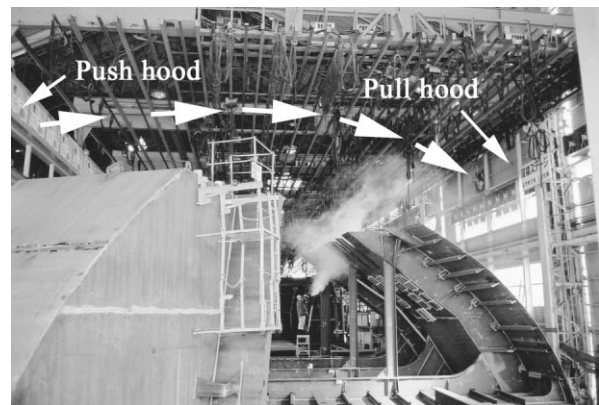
Push-pull assist zone (PAZ) ventilation in a welding shop.
